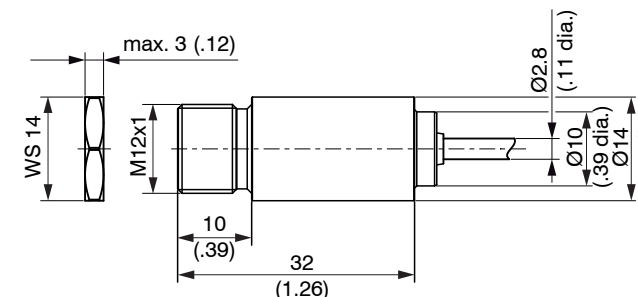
Dimensional drawing of sensor with integrated CF lens
